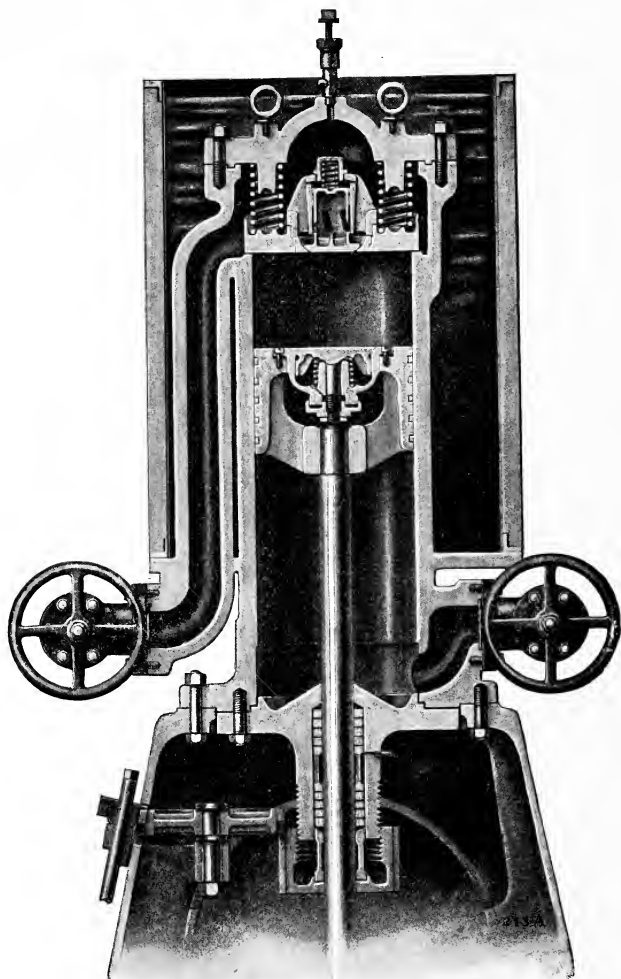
Cylinder of Single Acting Refrigerating Machine.
